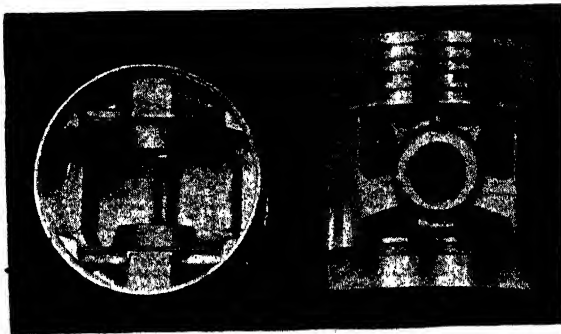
Permanent-mold aluminum piston, typical of those produced in vast quantities for many internal-combustion engines. Because the core has to be undercut to form the recesses below the bosses, it is made in three sections, which are removed separately from the casting.
